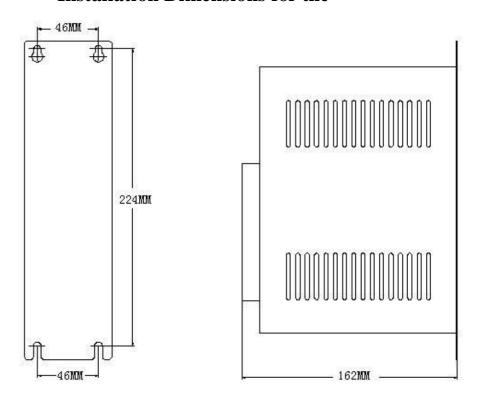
Installation Dimensions for the Servo Driver of 50A/75A
